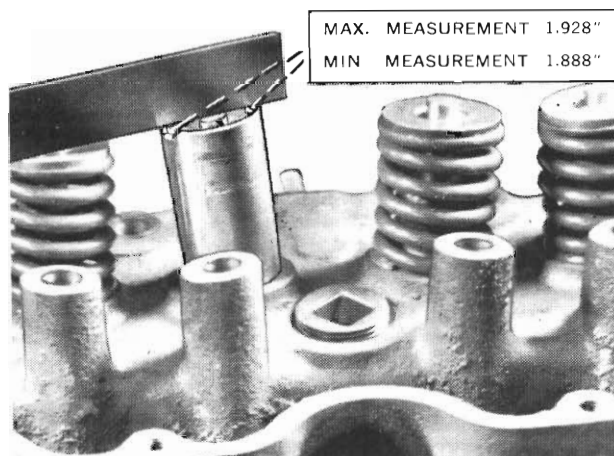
Measuring valve stem length using Tool No. E9C35C
